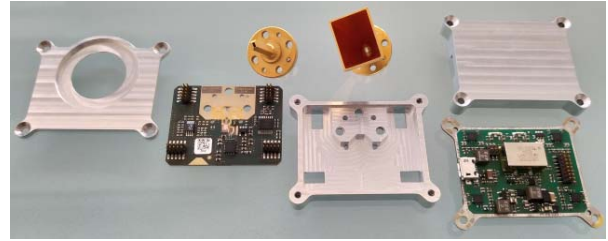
Photograph of disassembled  $D$ -band radar consisting of separate front-end (left) and back-end (right) board and three aluminum housing parts.
